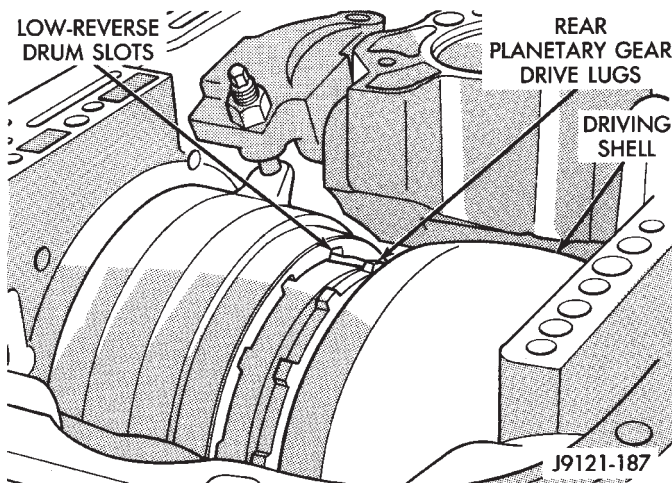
Aligning/Seating Rear Planetary In Low-Reverse Drum
